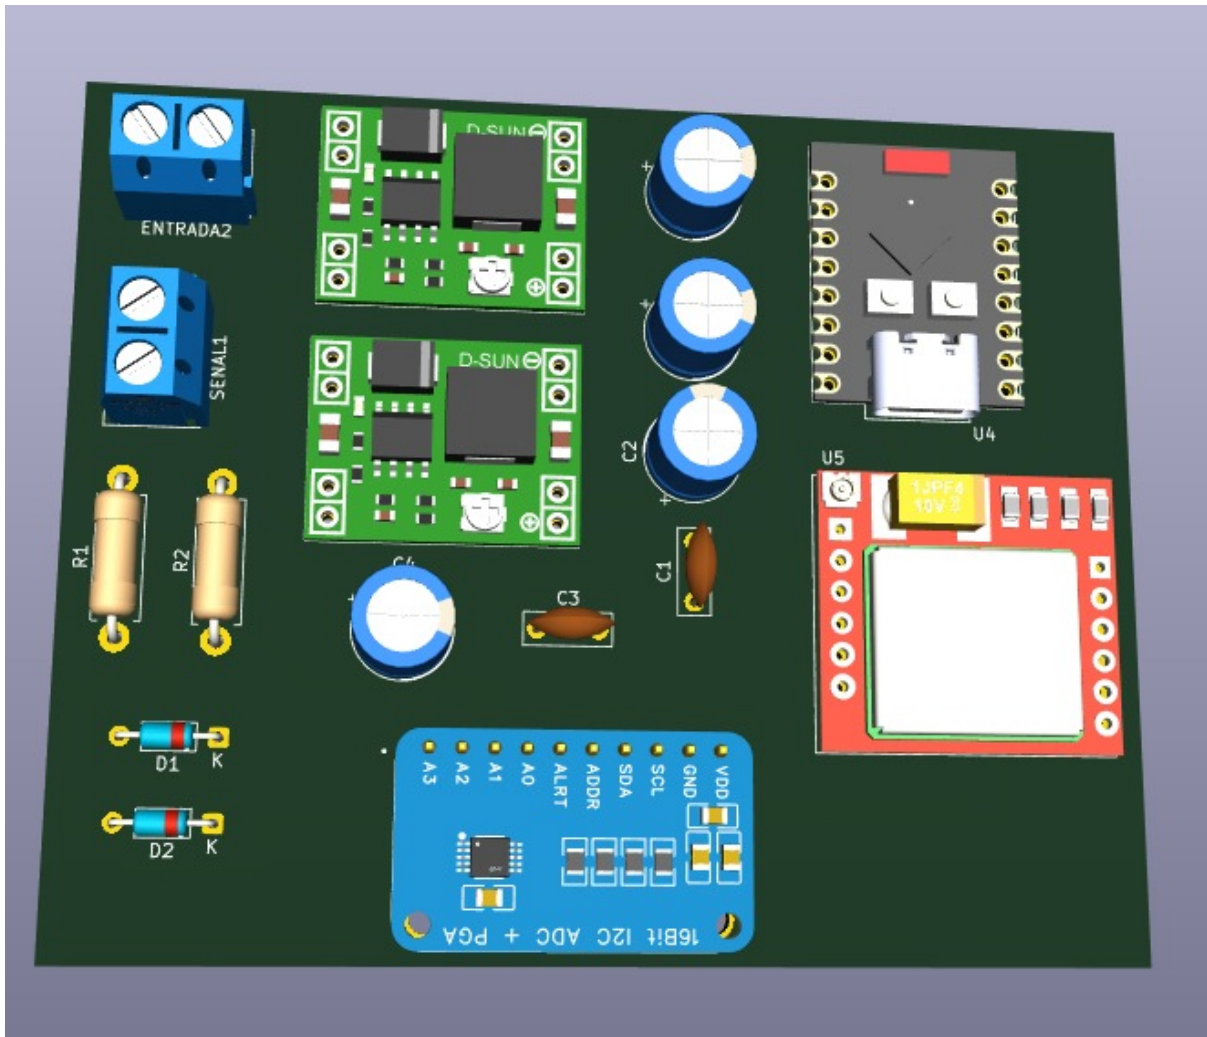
Final printed circuit board (PCB) developed for the prototype
